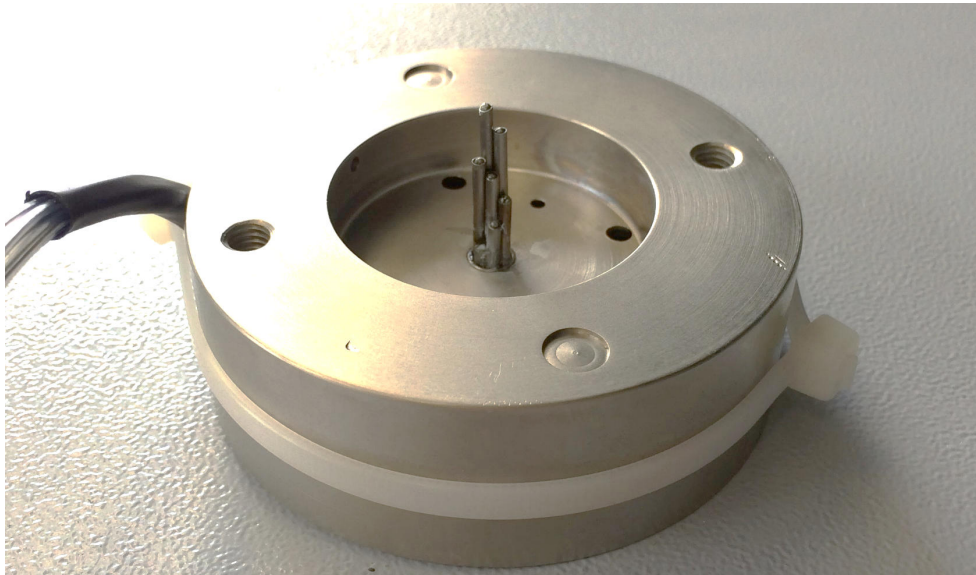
e: In-situ thermocouple probe assembly installed in modified mould base
